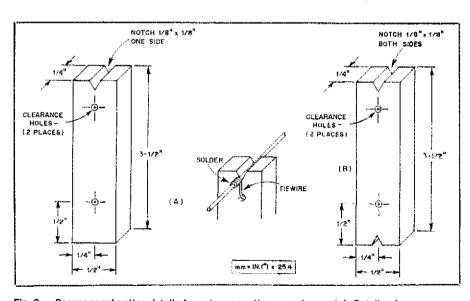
Spacer construction details for antenna sections are shown at A. Details of a spacer used for constructing the open-wire line are shown at B.
